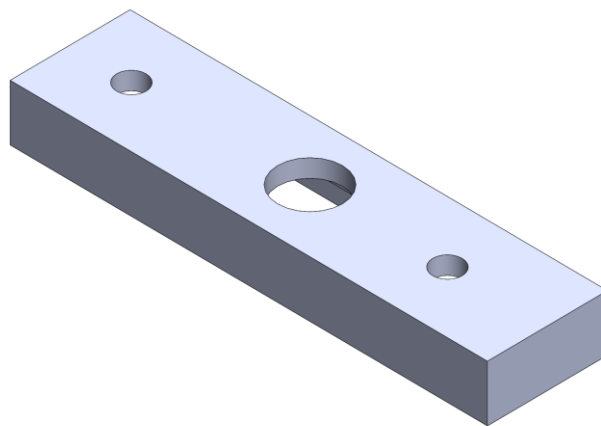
Top lid with holes for attachment of, from left to right: pneumatic fitting, nozzle holder, and manometer.
